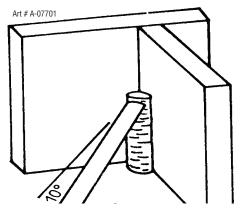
Single Run Vertical Fillet Weld
